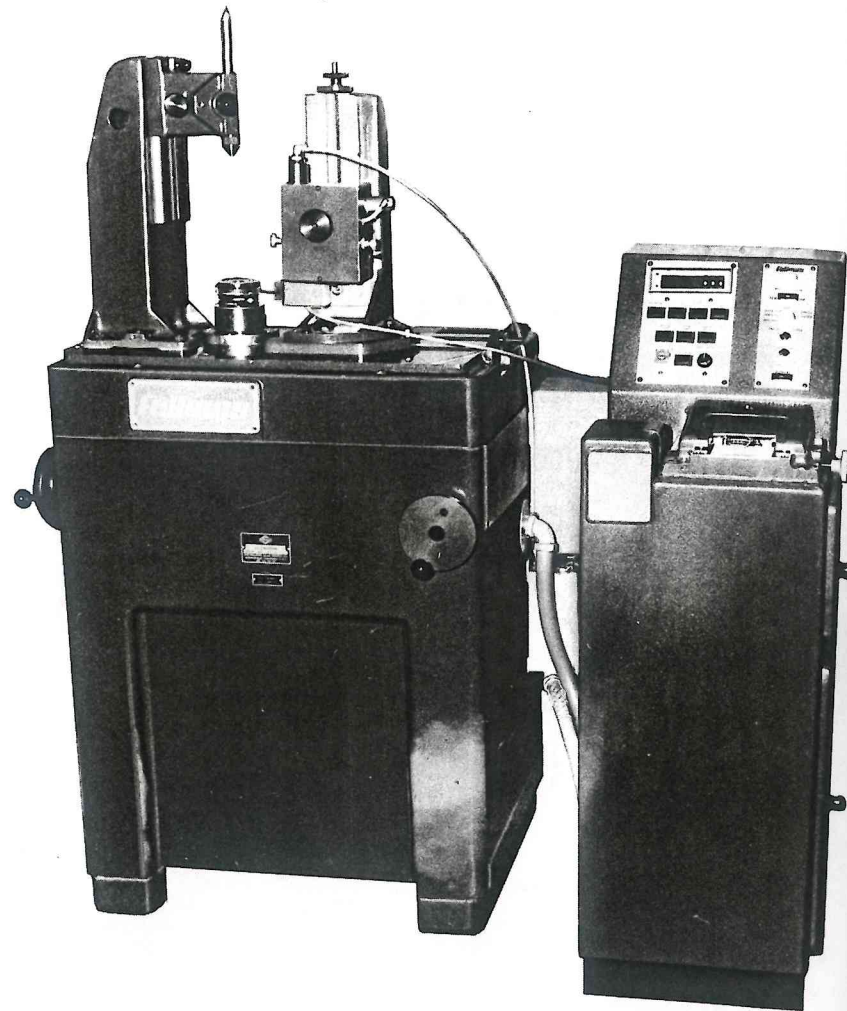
True-position spacing checker. (Courtesy of Fellows Corporation, Springfield, Vt.)
